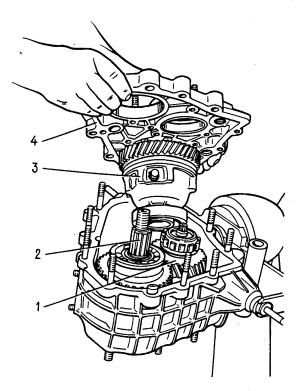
Removing Transfer Case Front Cover: 1 - countershaft; 2 - drive shaft; 3 - differential; 4 - front cover
